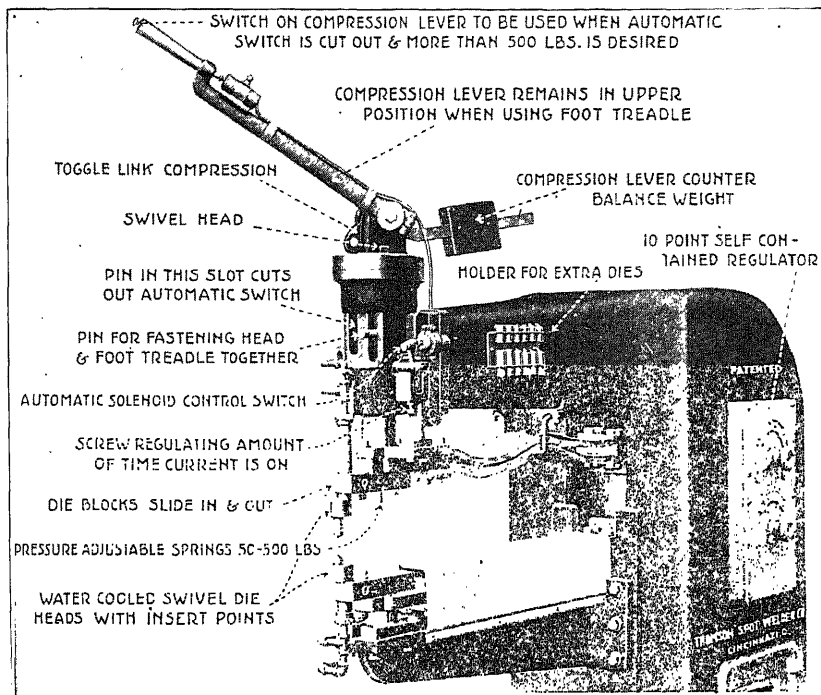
Spot-Welding Machine for Heavy Work, with Parts Named.
